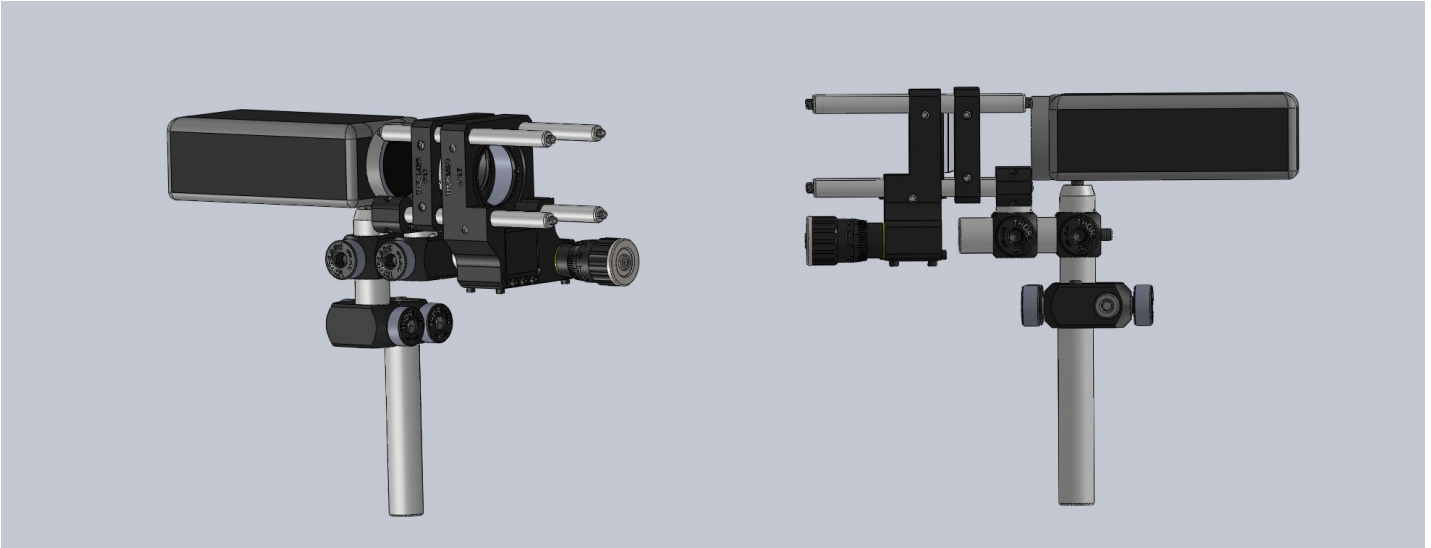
Assembly of the complete high-speed camera and cage system setup as created in SolidWorks
